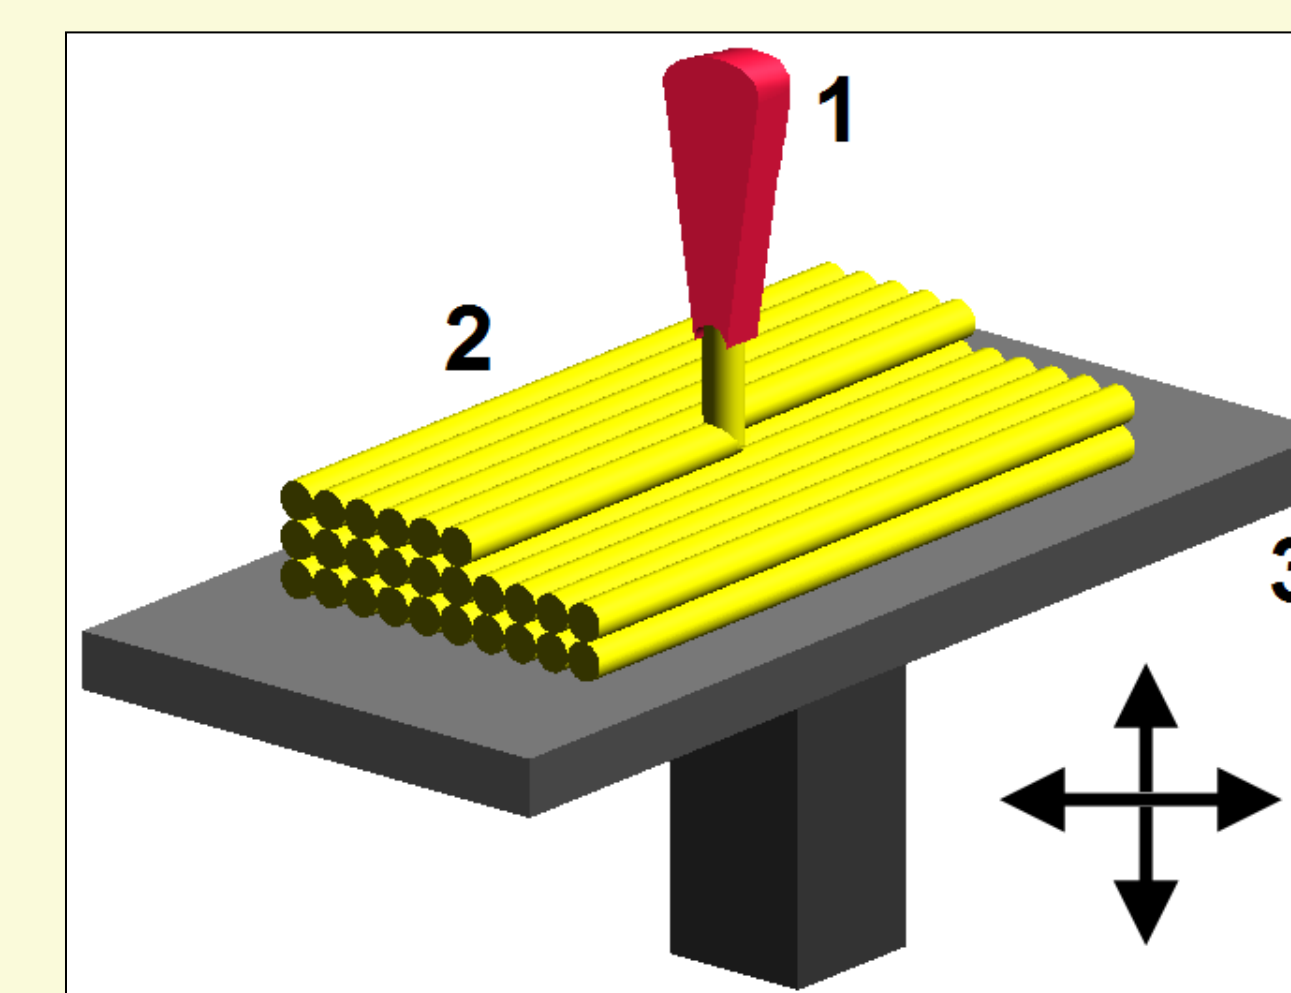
Fused deposition modeling (FDM) method: 1 - nozzle ejecting plastic, 2 - deposited material, 3 - movable table [3].
